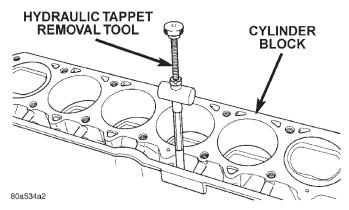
Hydraulic Valve Tappet Removal— Installation Tool
